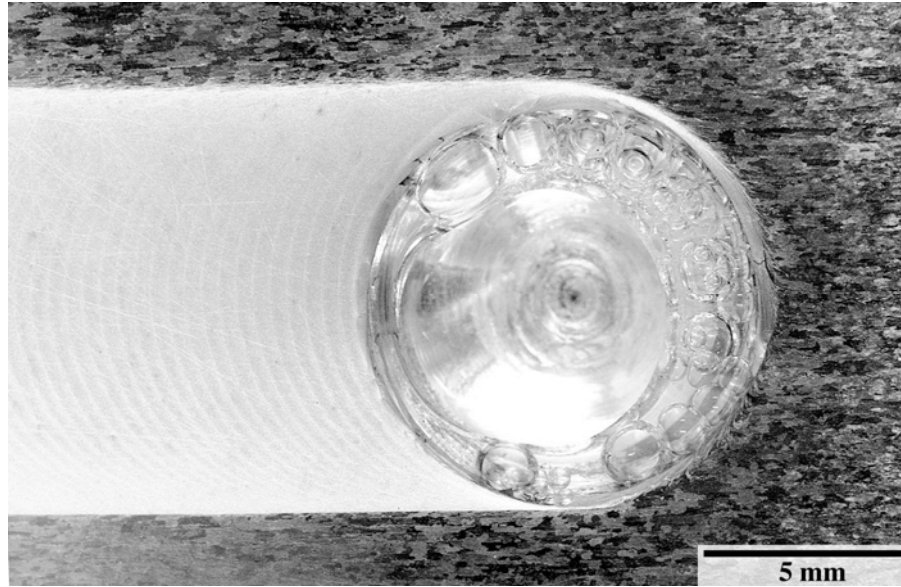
Midsectional plan-view of macrostructure around FSW pin, tool spindle rotating counterclockwise at 220 RPM, travel to the right at 3.5 inches per minute in 0.317 inches thick 2219-T87 aluminum alloy. The weld was suddenly stopped and the pin backed out of its cavity, which has been replaced by a bubble-filled mounting medium. Note the very sudden refinement in structure at the shear surface. Note the increased thickness of the rotating plug of weld metal beneath the shear surface on the retreating edge of the pin to accommodate backflow of metal around the pin. In sections closer to the shoulder the shear surface moves out to enclose a wider expanse of rotating plug metal.
